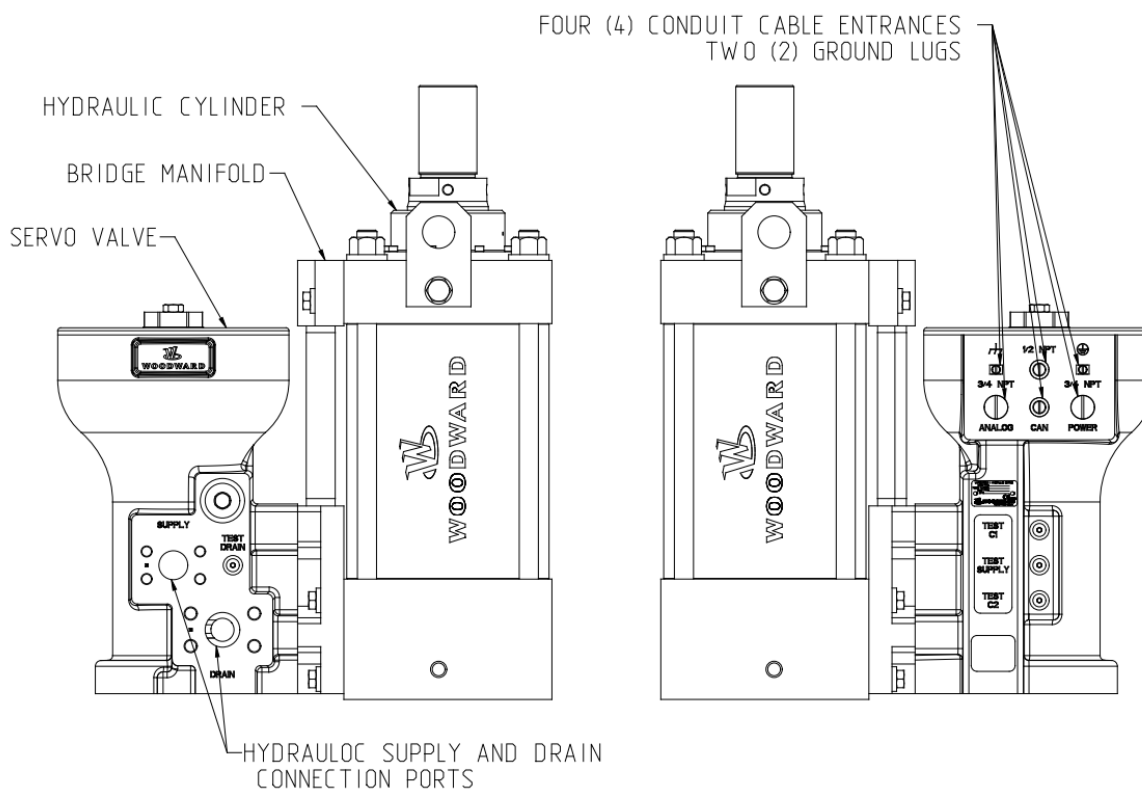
Basic Mechanical Components and Installation Interfaces
